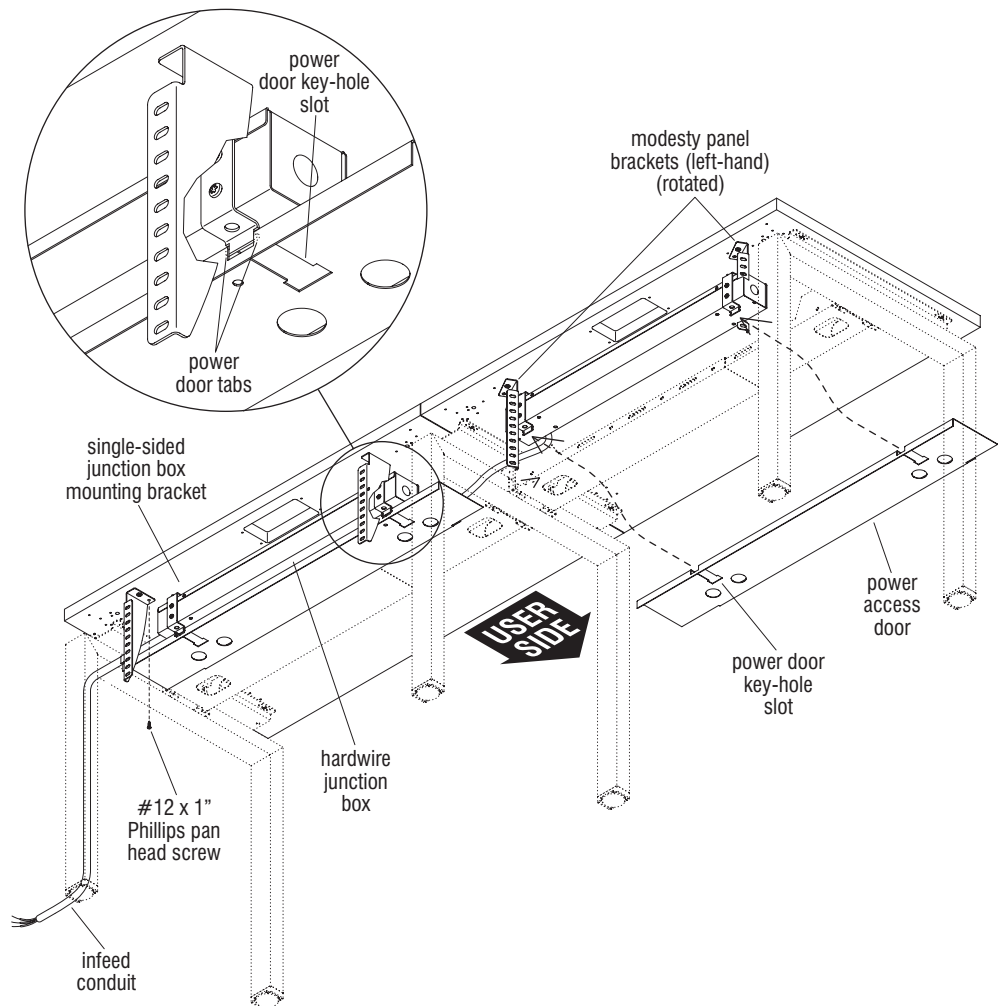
Single-Sided Fixed Benching with Hardwired Electrical - Access Door Installation
